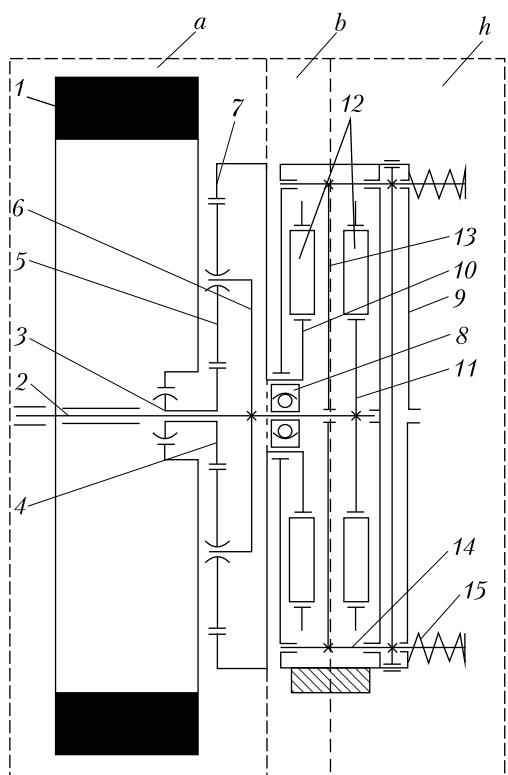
Scheme of the planetary drive of the crank press: 1 – flywheel; 2 – main shaft; 3 – gear clutch; 4 – central wheel; 5 – satellites; 6 – carrier; 7 – outer wheel; 8 – support bearings; 9 – pneumatic cylinder; 10 – activation brake; 11 – stop brake; 12 – friction tabs; 13 – pressure plate; 14 – guide pin; 15 – springs
